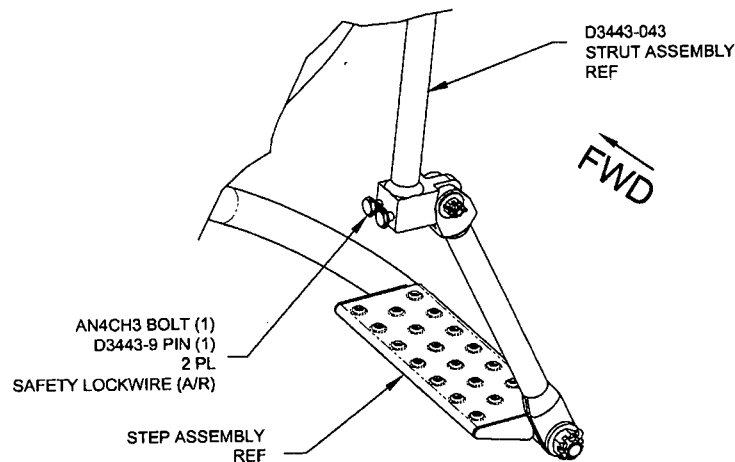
Detail Safety Wiring, D412-630-032 RH, Pilot/Co-Pilot Folding-Step Installation (Shown)
